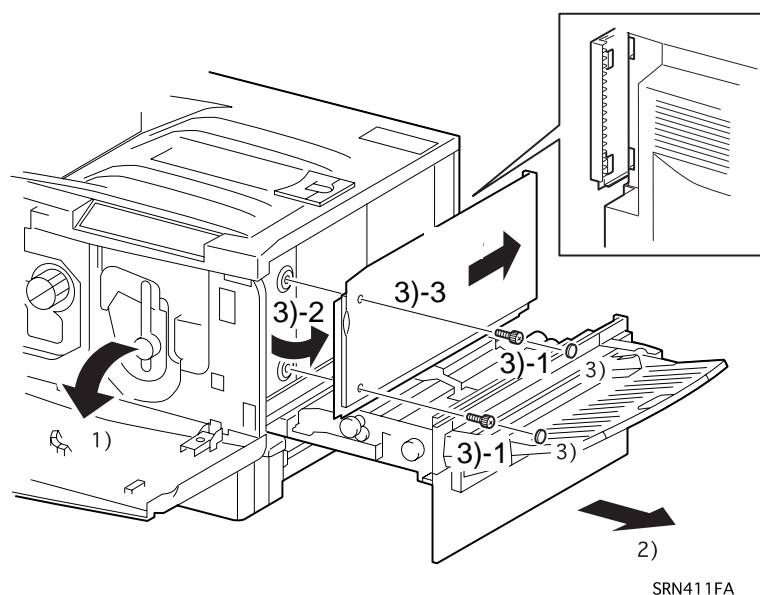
RIGHT COVER ASSEMBLY Removal
